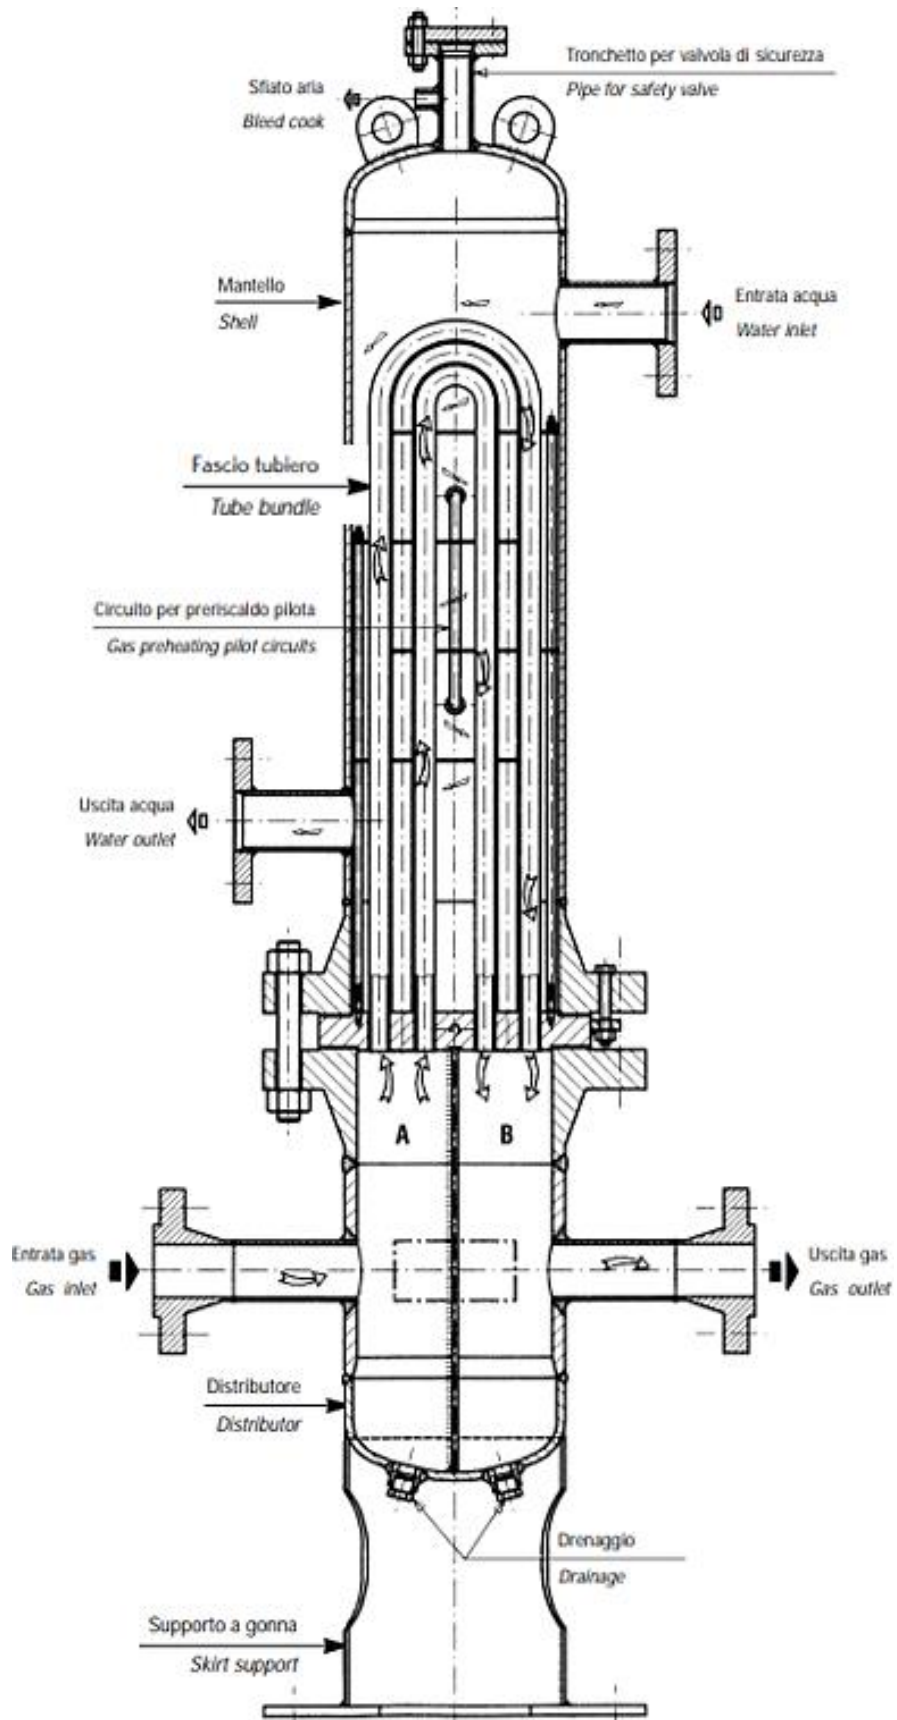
KSI shell and tube heat exchanger (from [19]).
